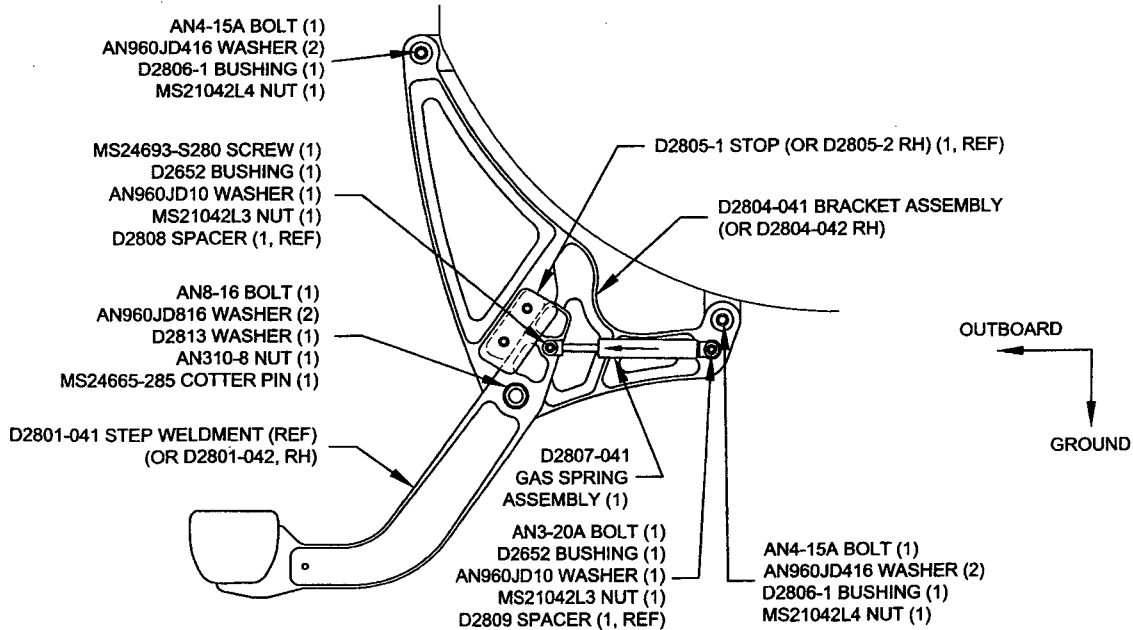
Strut Detail for D412-630-011/-012 Heli-Access-Step™ Installation (NOT TO SCALE)
